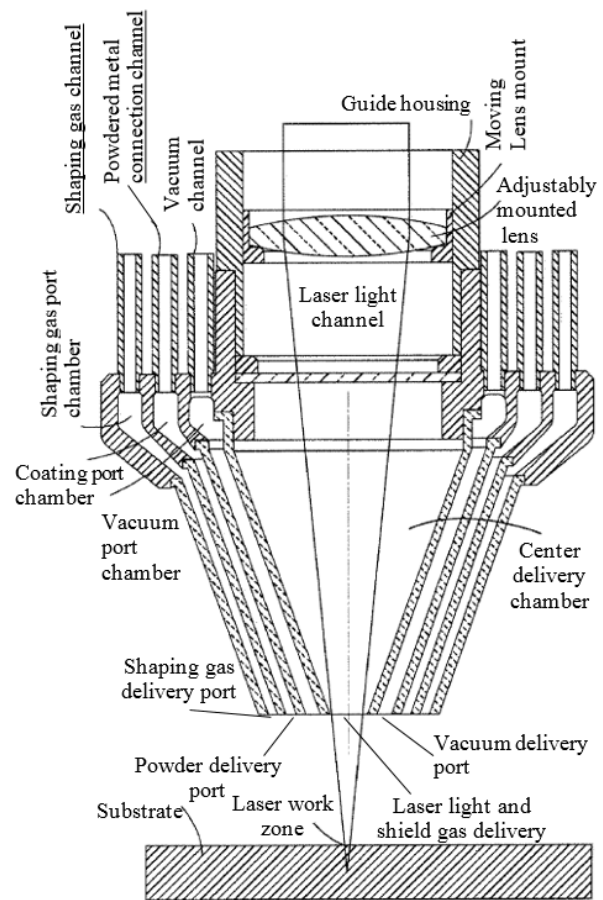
Possible embodiment of a coaxial laser cladding nozzle [10]
